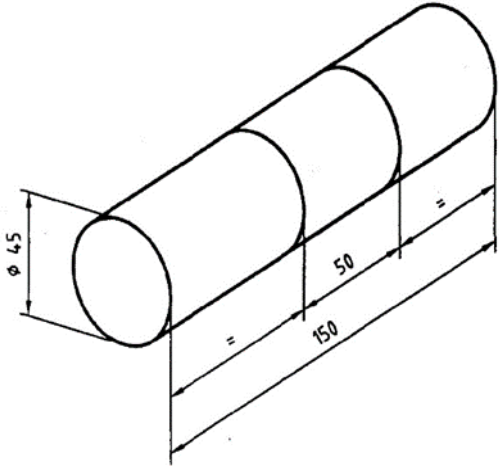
EXPOSED PROTRUSIONS TEST CYLINDER
